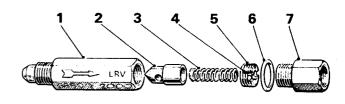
EXPLODED VIEW OF THE RELIEF VALVE
